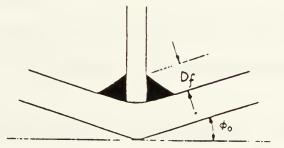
Angular Change of Free Fillet Weld [30].
